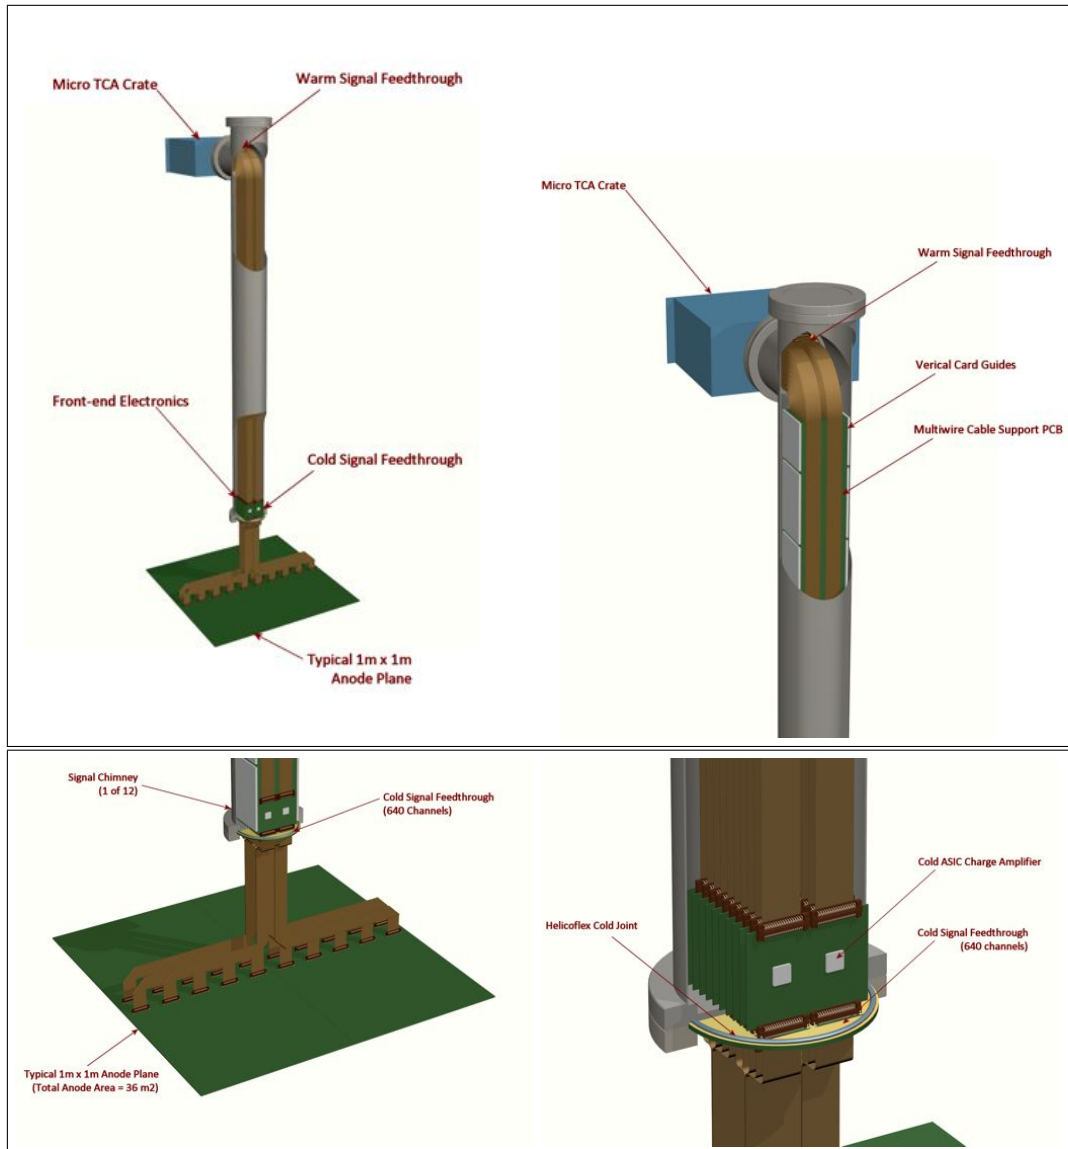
Details about the chimney, the signal feed-throughs, the inserted F/E electronics cards, and the foreseen cables layout.
